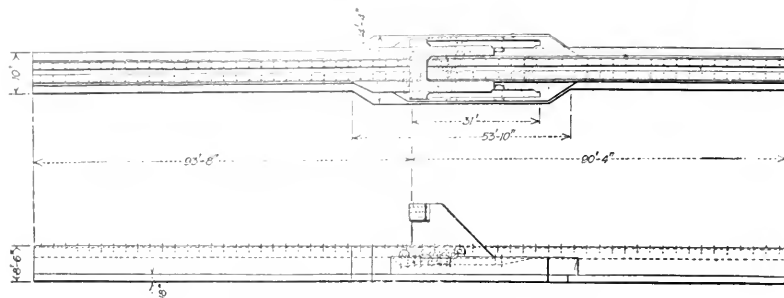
PLAN AND SIDE ELEVATION OF PLANING MACHINE
